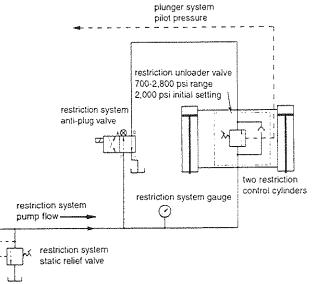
Restriction system static relief gauge and valve (dwg 24610E excerpt)
